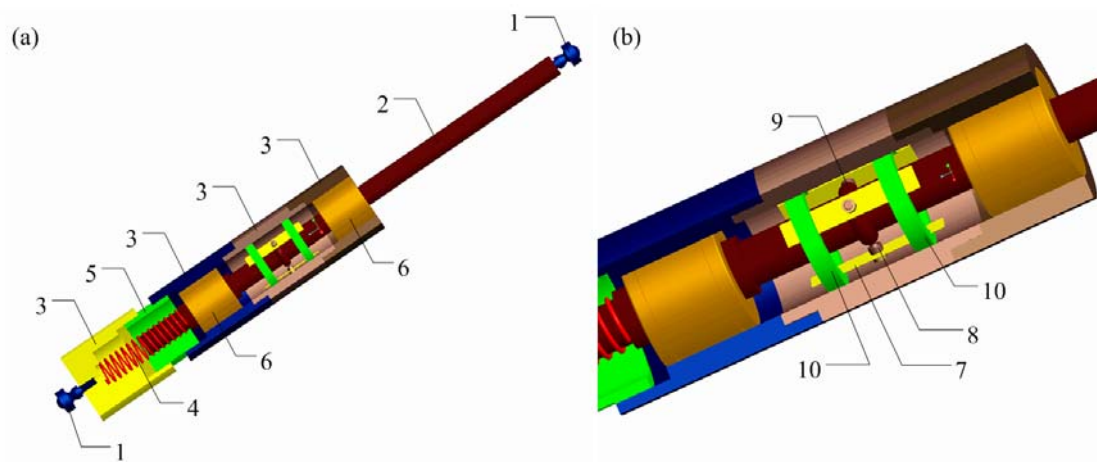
Schematic diagram of QZS strut at the static equilibrium position. (a) Internal configuration; (b) a partially enlarged view. 1 ball joint, 2 rod, 3 sleeve, 4 coil spring, 5 adjuster, 6 linear bearings, 7 flexible beam, 8 roller fixed on the beam, 9 cam fixed on the rod, 10 holder of flexible beams.
